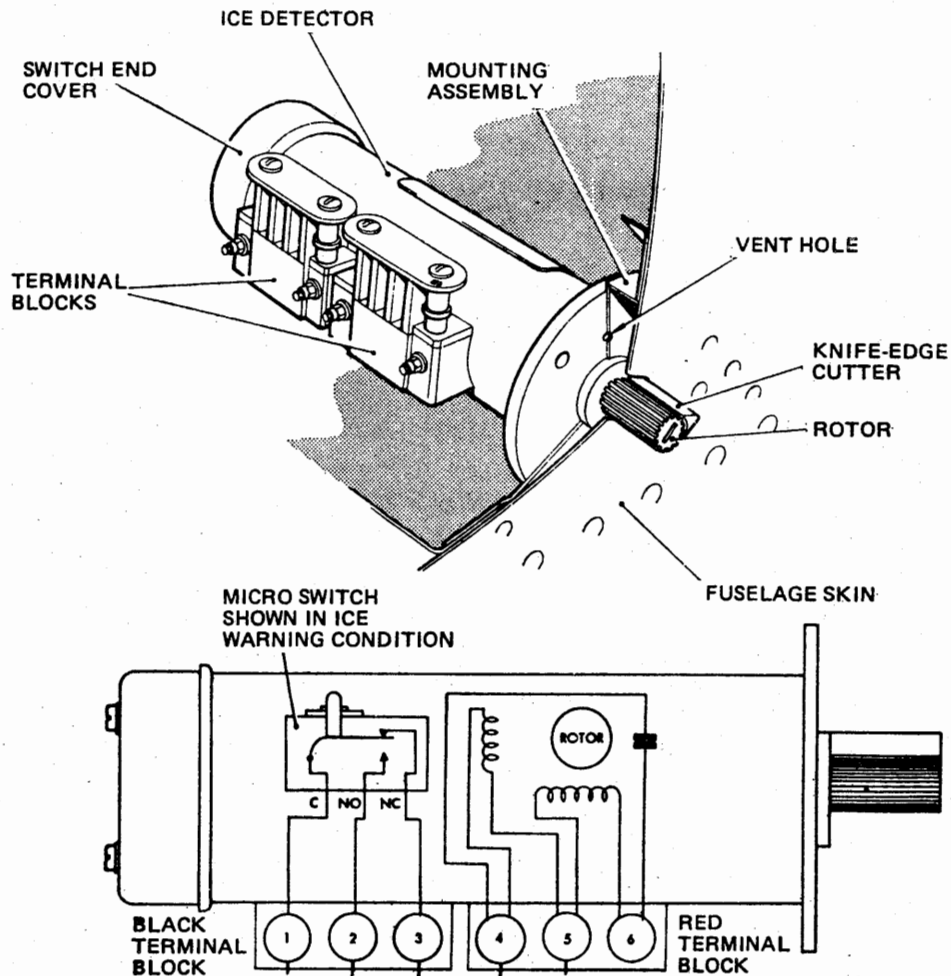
SERRATED ROTOR ICE DETECTOR HEAD
